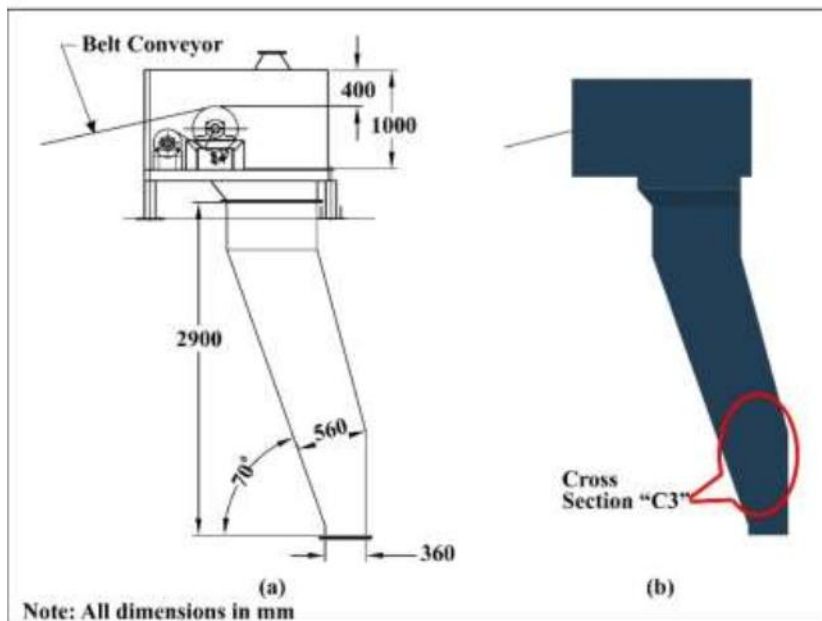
(a) 2D drawing and (b) CAD model of modified chute design-2
